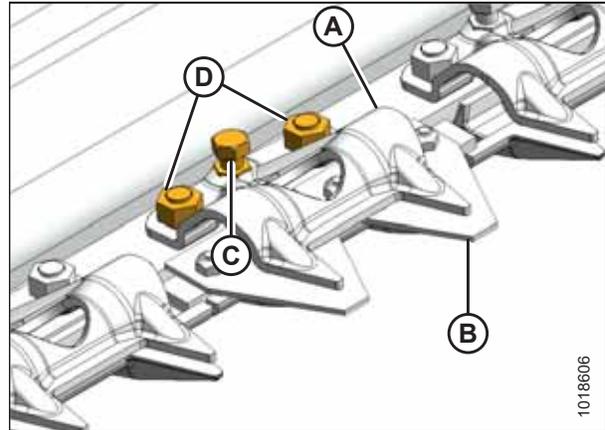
Stub Guard Sheet Metal Hold-Down
